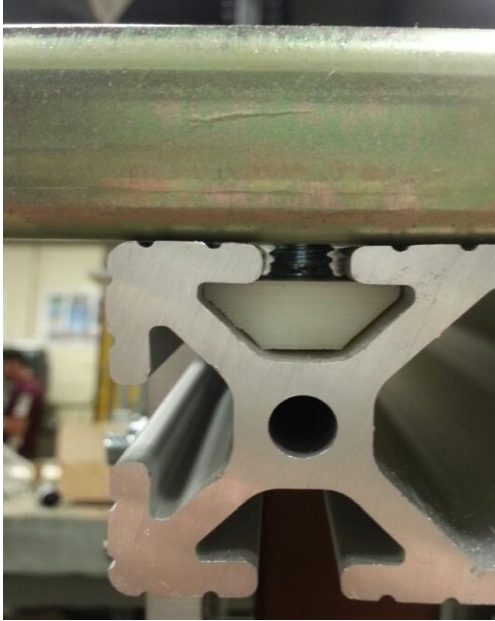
The T-slot plastic bolt adaptor used in the mechanical system.
